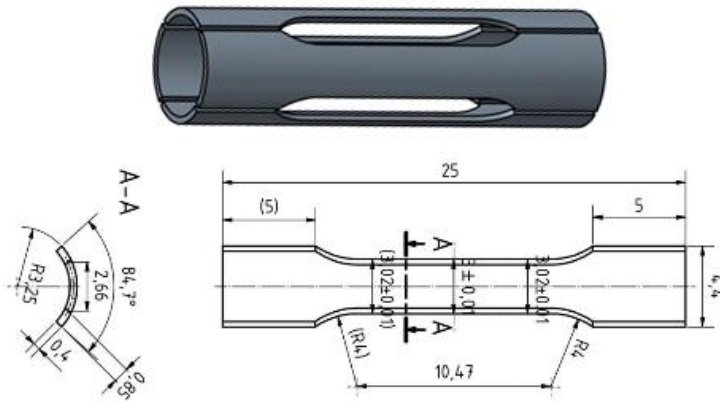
Sub-sized uniaxial specimen manufactured from a cladding tube [4].
